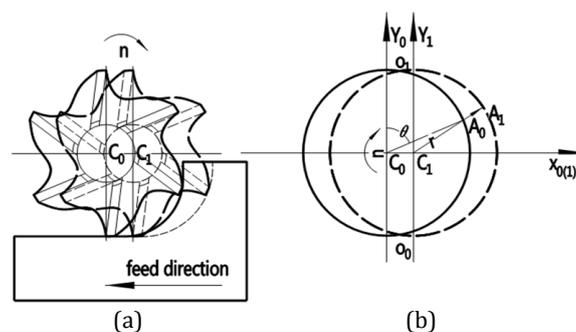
Model for milling cutter rotation: (a) milling along the liner direction; (b) milling tooth trajectory in Cartesian coordinate system
